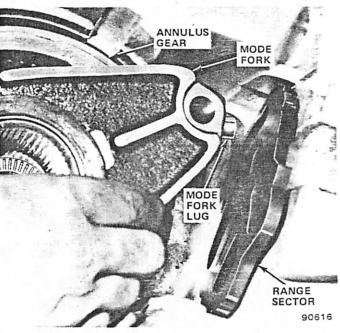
D-21 Annulus Gear and Mode Fork Removal/Installation
